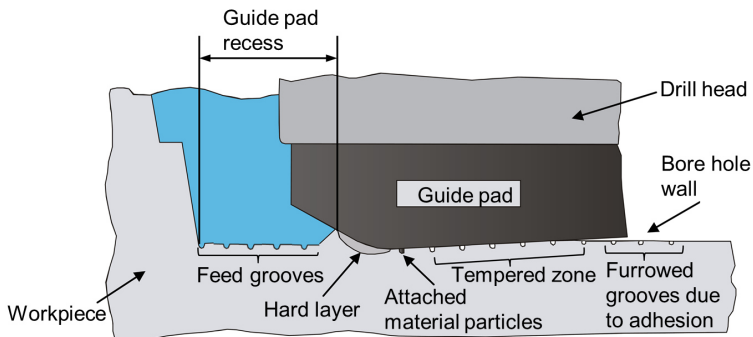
Surface generation in BTA deep hole drilling through the combined conditioning mechanisms of cutting insert and guide pad. According to [147,174]<sup>17</sup>
